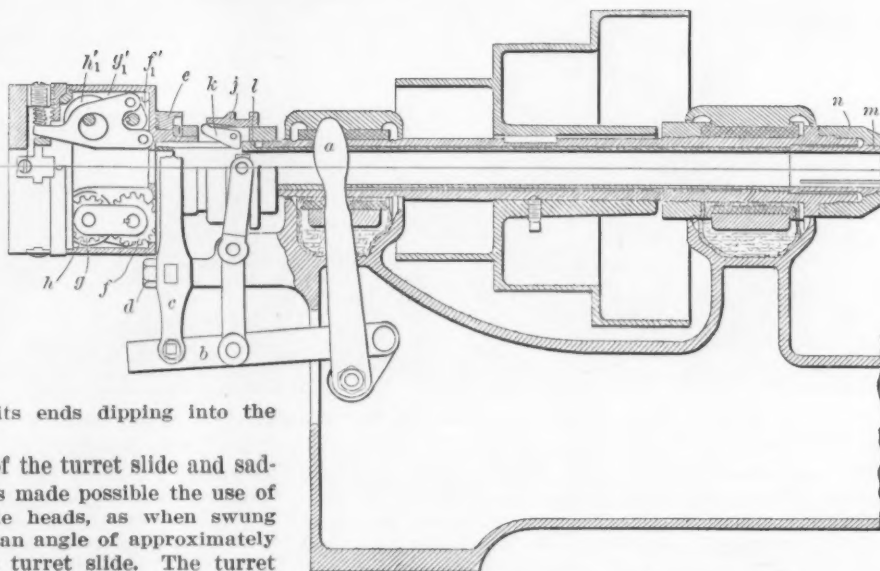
Sectional View of the Spindle Head and Roller Feed.
